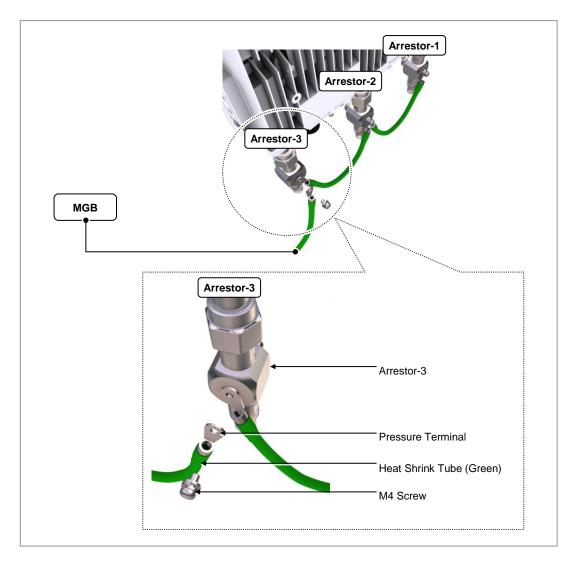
Connecting a Ground Cable to the Arrestor (3)
